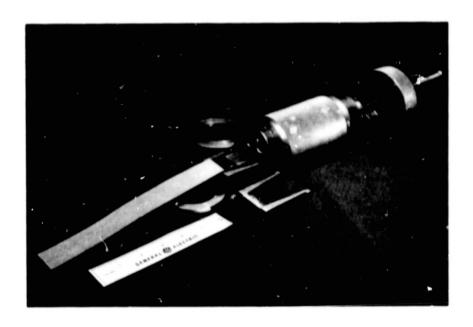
Disassembled-Exploded View of Laboratory Extrusion Press Used During this Study
